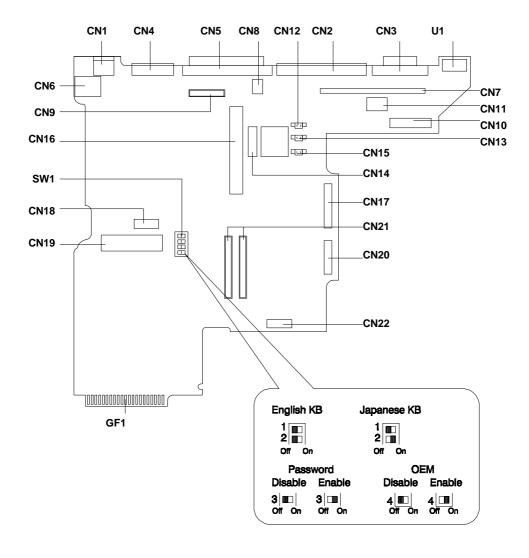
PCB No. 97349-1 Keyboard/Touchpad Board (Bottom View)
